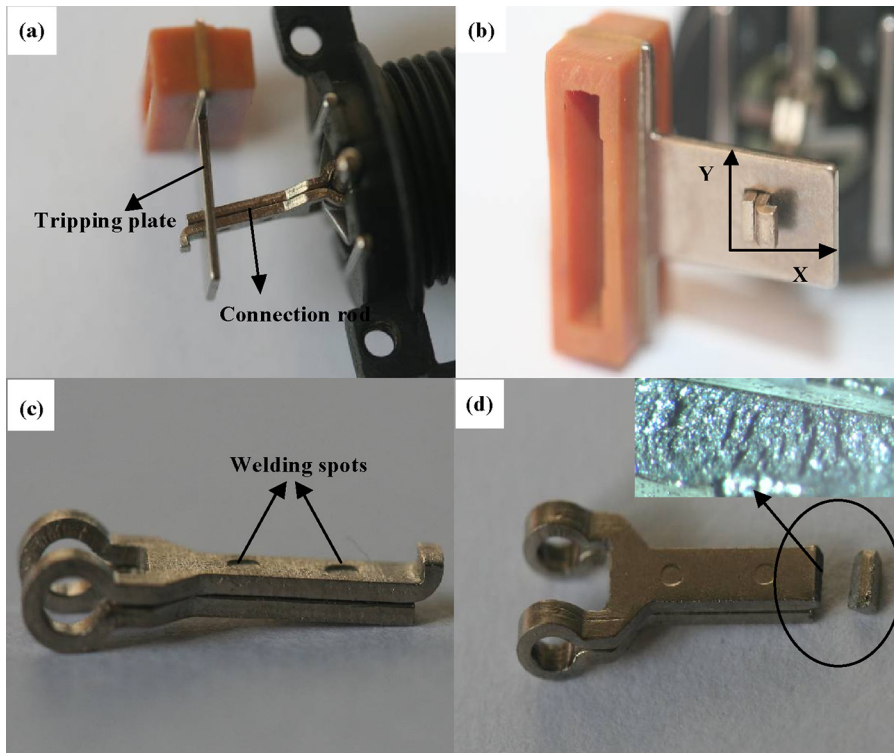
Macrographs of the linkage and the other components. (a) The tripping plate with positive side and rod, (b) the tripping plate with the other side and rod, (c) linkage and (d) fractured sample.
